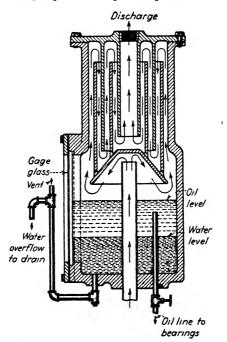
Oil and water separator. (Courtesy of Beach-Russ Co.)
